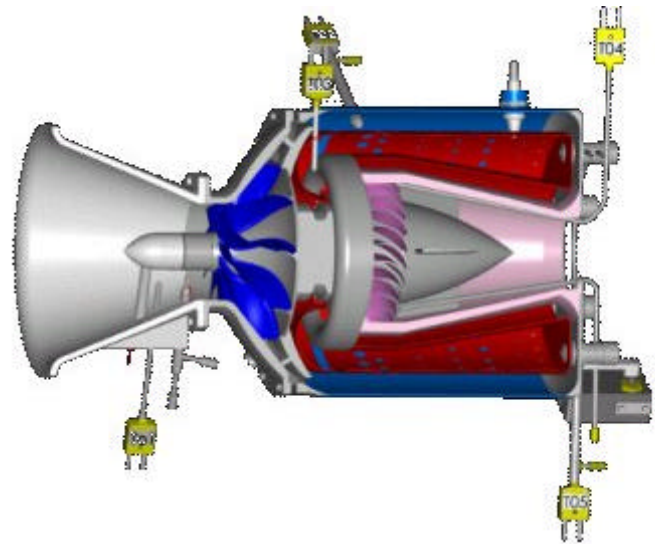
Drawing of the SR-30 Turbojet Engine, Reference 1.
